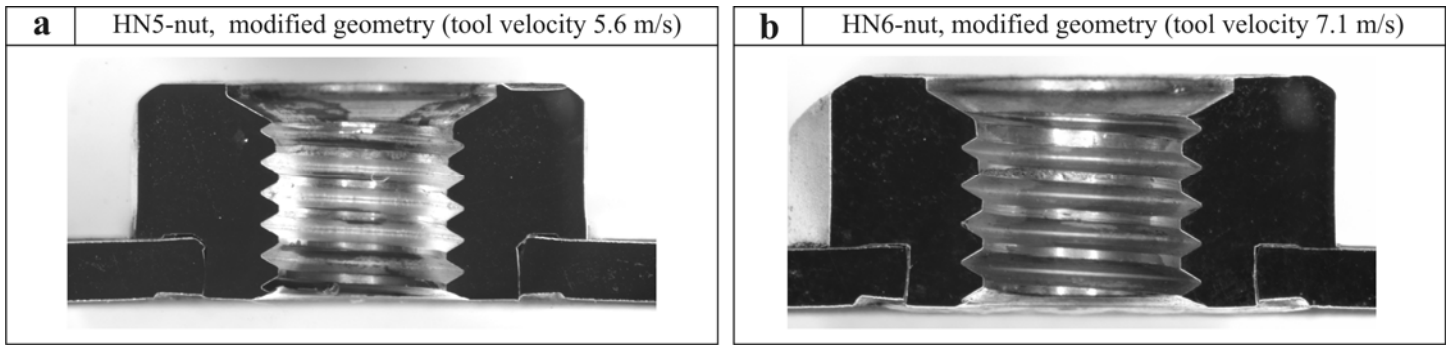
Self piercing nut - sheet metal connections with modified self piercing nut geometry (sheet metal: 22MnB5,  $t = 1.5$  mm)
